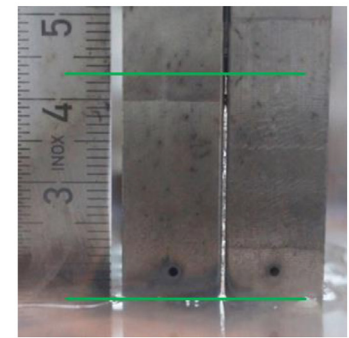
(milling) + 6 (milling), gap: 0.3 mm.
